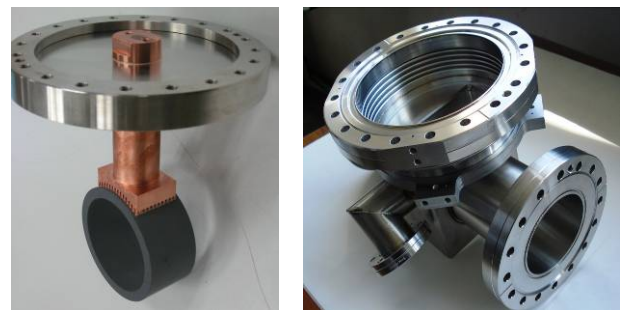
parts of the BLA prototype: (left) damping ceramic ring welded to the copper stub and (right) housing made of stainless-steel.
